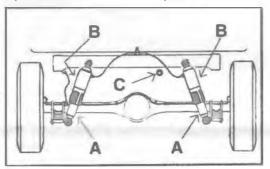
, Assembled Components, Componentes montados, Composantes assemblées
